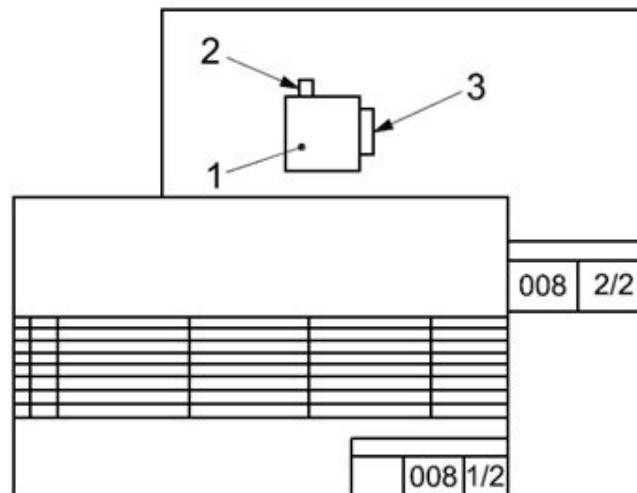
Parts lists and assembly drawing as one document, but different sheets
